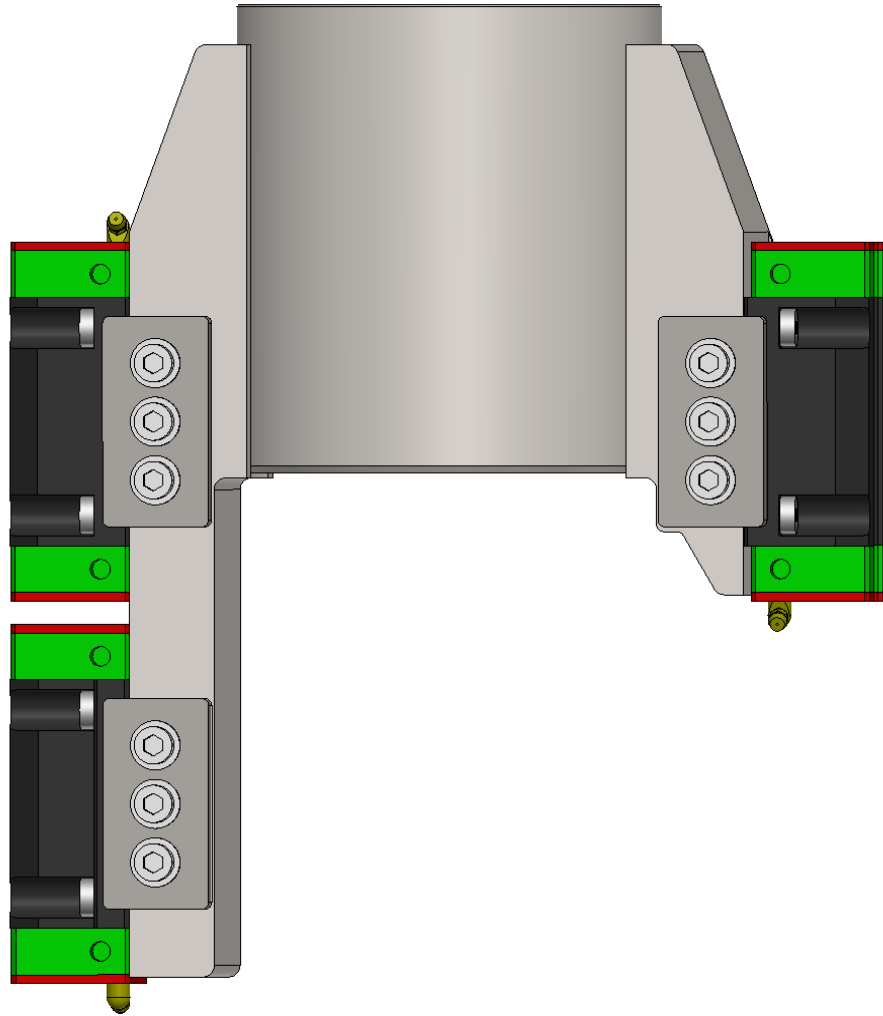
The linear actuator carriage with linear bearing blocks and clamps
